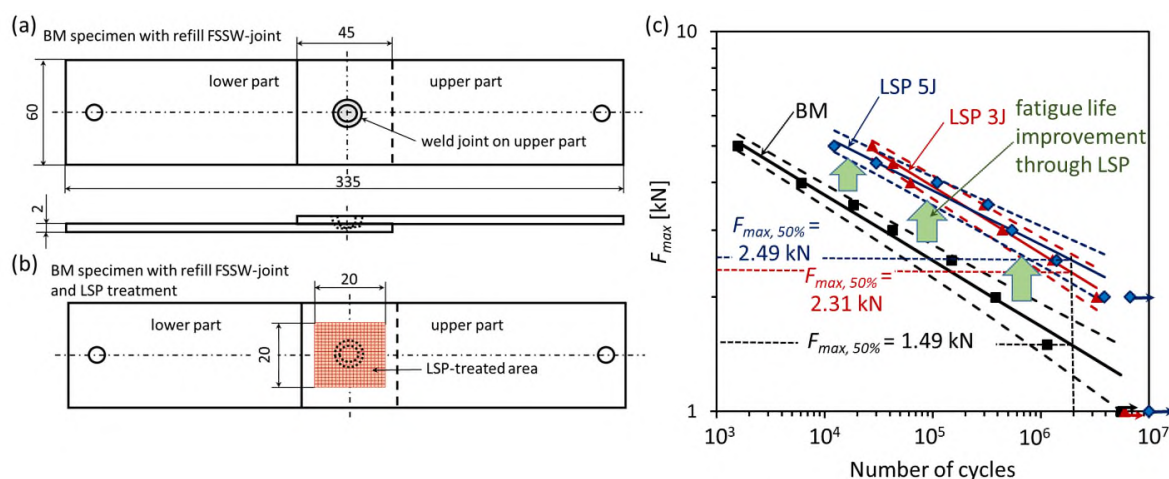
(a)-(b) Sketch of the investigated specimens: (a) BM specimen with overlap refill friction stir spot joint (refill FSSW), (b) BM specimen with overlap refill FSSW joint and LSP treatment of the joint area on the upper part. All dimensions are in mm. (c) Fatigue test results. In the diagram the mean S-N curves (survival probability of 50 %) with the values of maximum loads at 2×10^6 loading cycles (Basquin fatigue strength) together with 10% and 90% confidence intervals for the three investigated cases – BM specimen with refill FSSW joint, BM specimen with refill FSSW joint and LSP treatment at 3 J laser energy and at 5 J laser energy – are shown.
